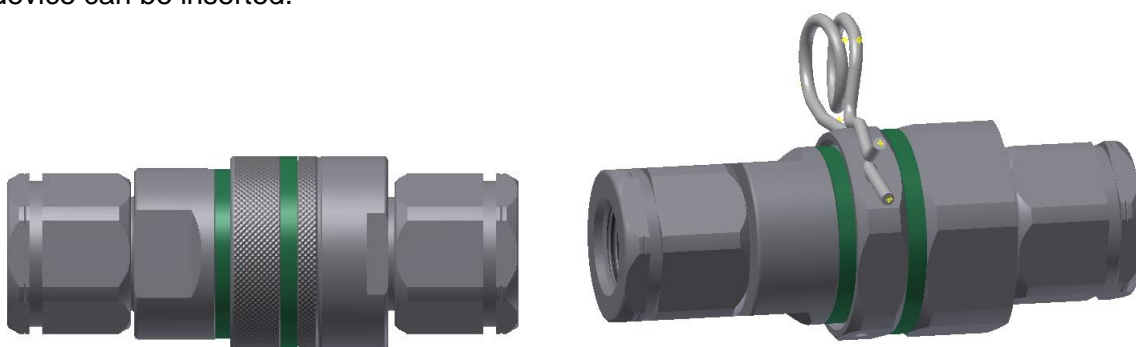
Diagram coupling halves: Tighten to the stop with a tool.
